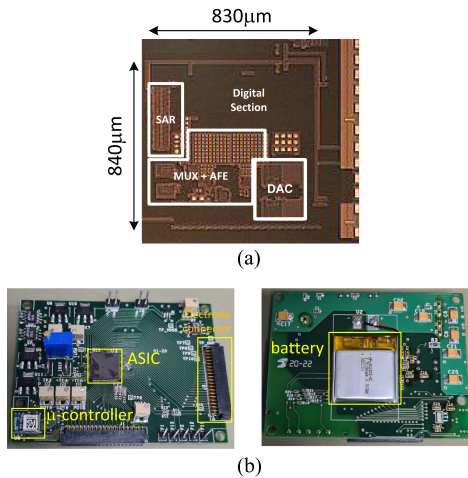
(a) Die photograph of the ASIC prototype. (b) PCB for the testbench.
